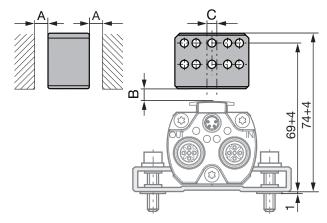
Dimensions and distances with BTL6-A-3800-2 magnet
